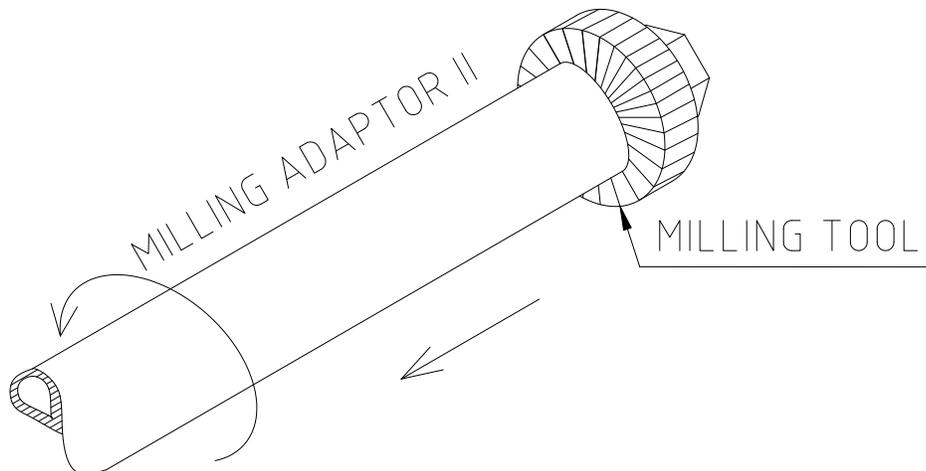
Facing of the seating surface on the inaccessible welded-on piece
